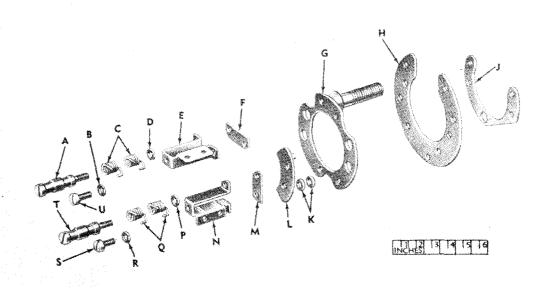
DISASSEMBLING COMMUTATOR END PLATE ASSEMBLY.
